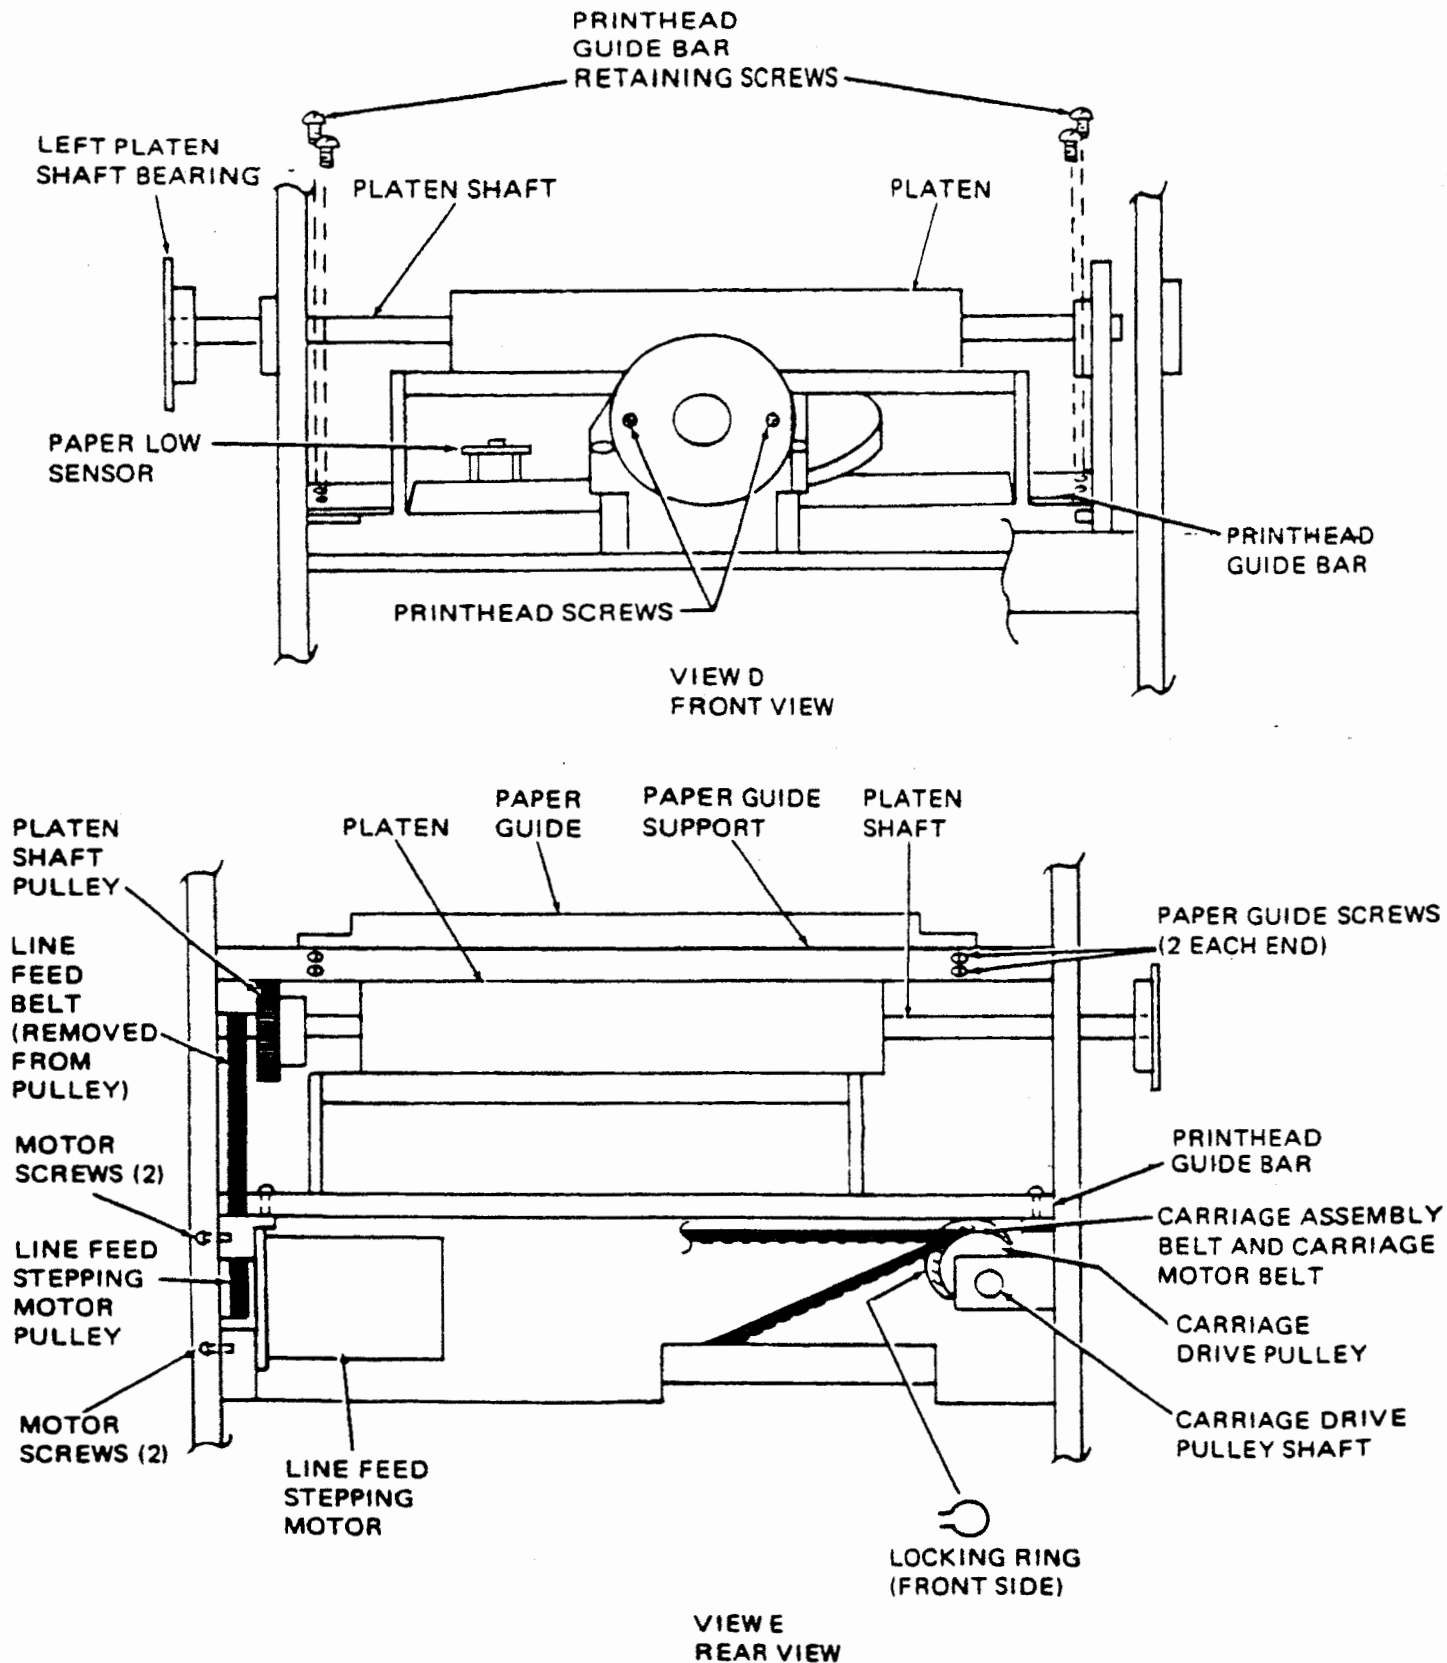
Print Mechanism Module, Carriage and Line Feed Belts (Sheet 2 of 2)
